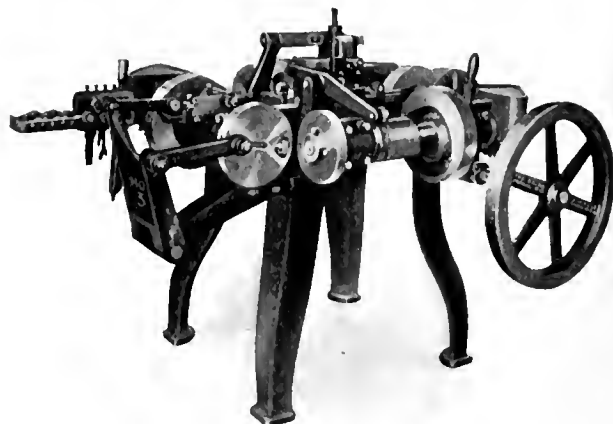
The Baird Four-slide Automatic Forming Machine for Wire Goods.
